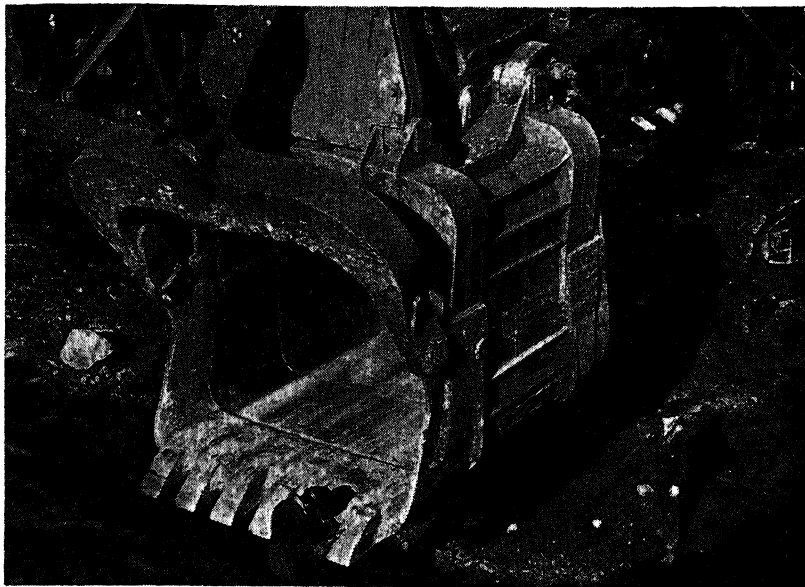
Building up worn dipper teeth of world's largest power shovel used in strip mining. Successive beads of super abrasion resisting electrode are laid cross-wise of the teeth covering faces and points.
